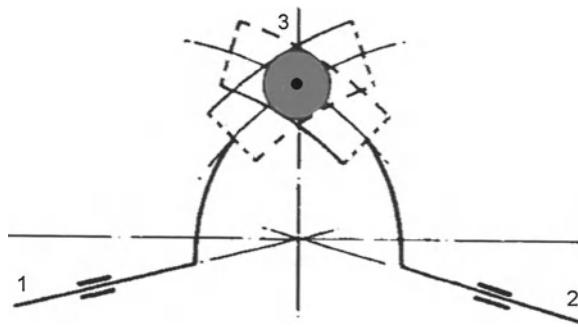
Scheme of a constant speed Rzeppa joint; only one ball 3 is represented, engaged with the two grooves on shafts 1 and 2 (from Genta and Morello 2009)
